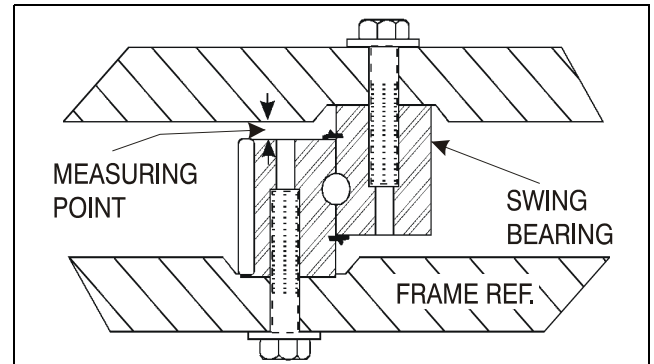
Swing Bearing Tolerance Measuring Point
